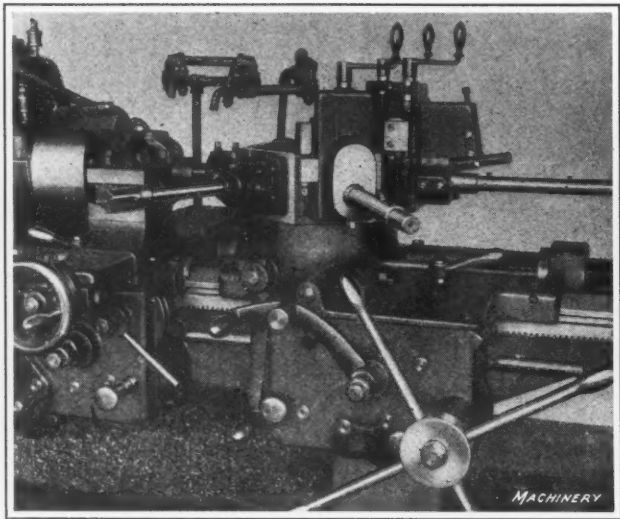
Machine equipped with Tools required in finishing the Differential Gear Case
